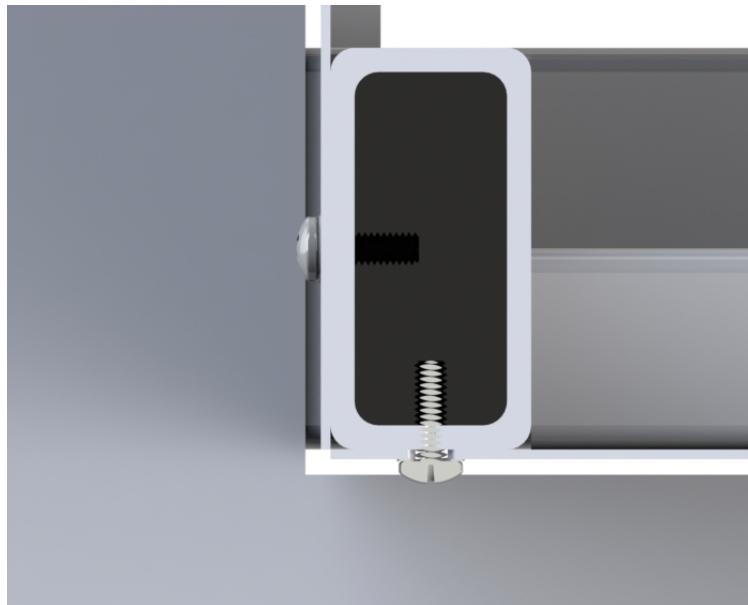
SolidWorks rendering of the Shell Fasteners
